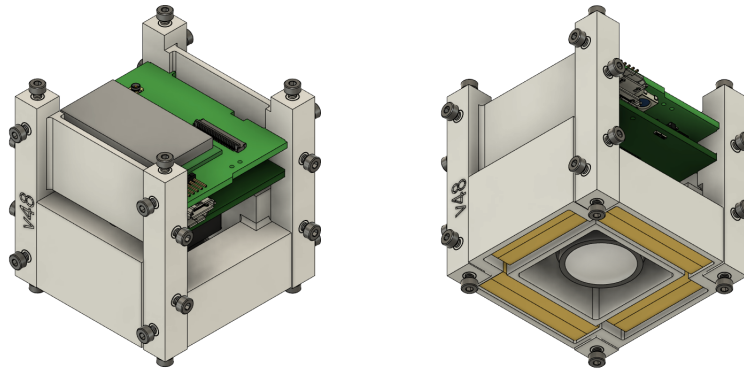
Initial mechanical design for PyCubed-Mini. Top-view (left), and bottom-view (right)
